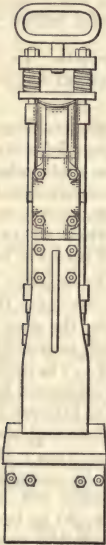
Small Power-hammer for Driving Sheeting Planks
